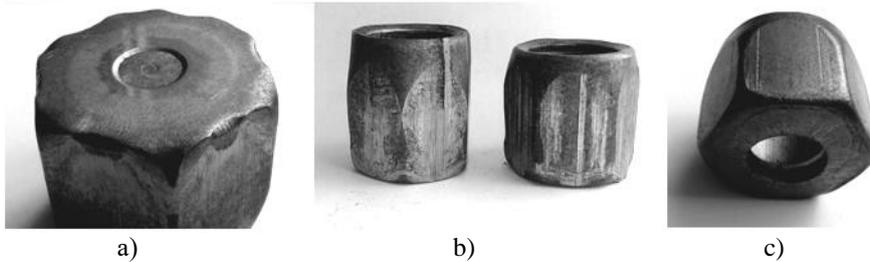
Surface defects of the nut blank obtained by cold extrusion: a – surges, weights; b – cracks, roughness, c – longitudinal lines.
